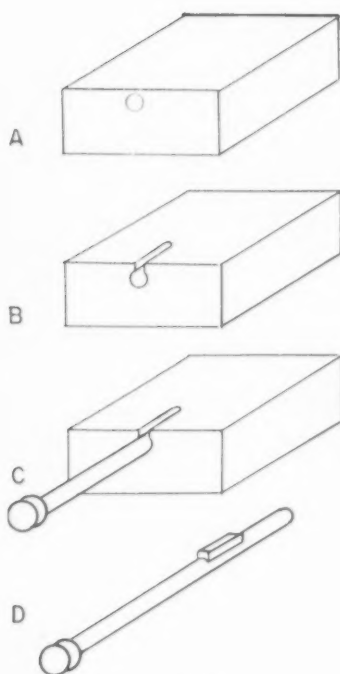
Electroforming a key on a pin: A) hole is drilled into plastic block; B) slot is cut into hole; C) pin is inserted into hole and key is plated on (projecting part of pin is masked); D) finished pin has an integral key
